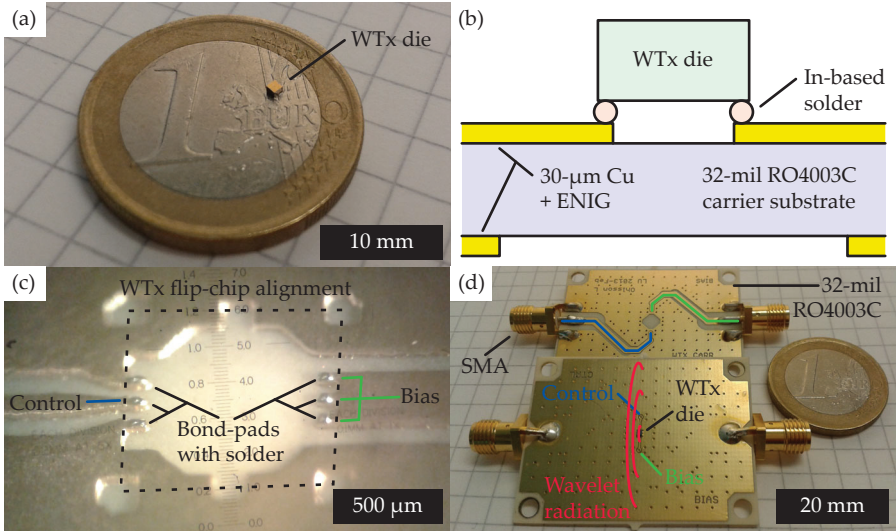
(a) A fabricated WTx die on a €1-coin, awaiting assembly on a carrier. (b) Schematic illustration of the solder-bonding assembly technique and (c) a mid-process photograph taken before the flip-chip die alignment and final solder step. (d) A finalised WTx prototype module, illustrating the control and bias inputs and mmW wavelet radiation output.
